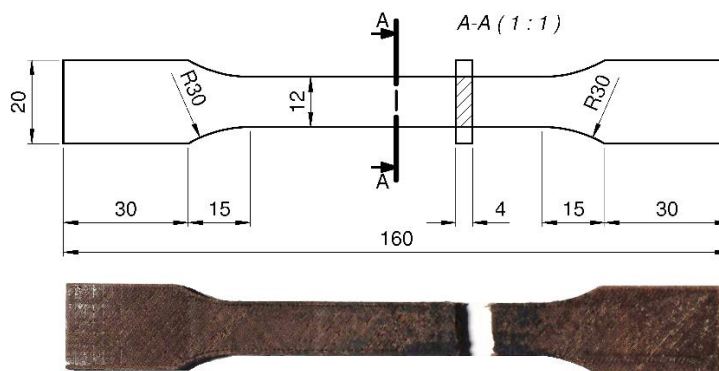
The shape and dimensions of samples for uniaxial tension testing
